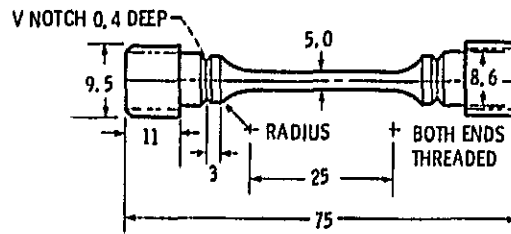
Sketch of test specimen. All dimensions in millimeters.
